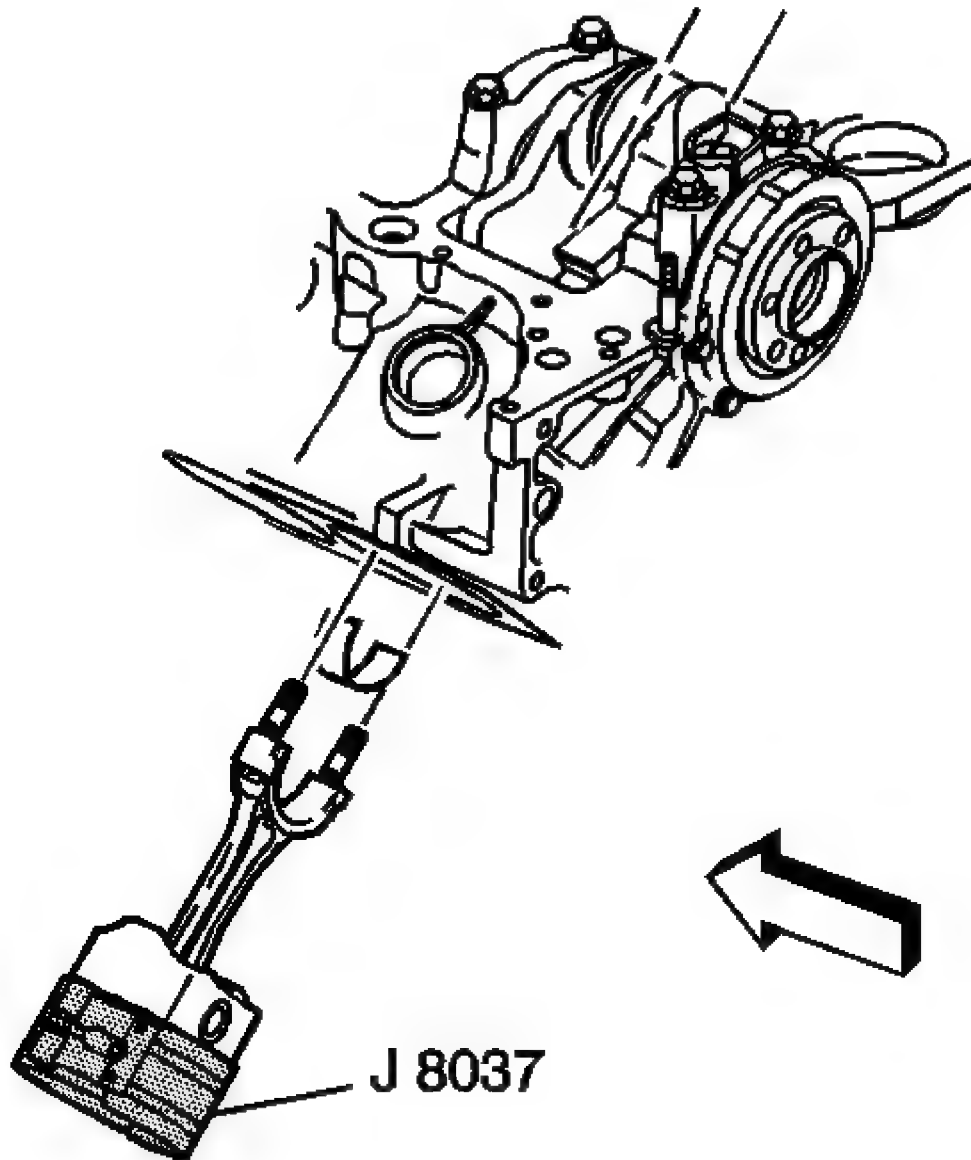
Installing Piston, Connecting Rod Assembly & J 8037 Into Cylinder Bore
